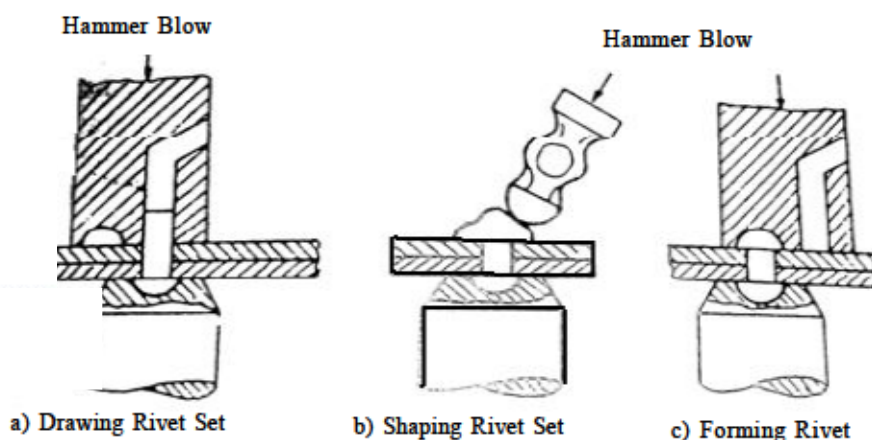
Rivet sets a) Drawing b) Shaping c) Forming
